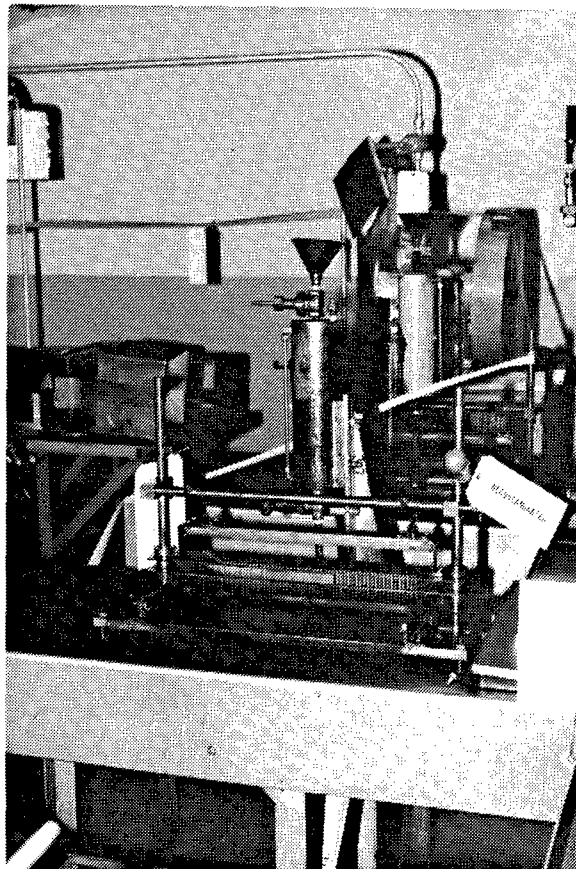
Building 135: A .30 caliber Primer Assembly Lacquer Unit manufactured by the Federal Cartridge Corporation and received by the plant in 1952.
